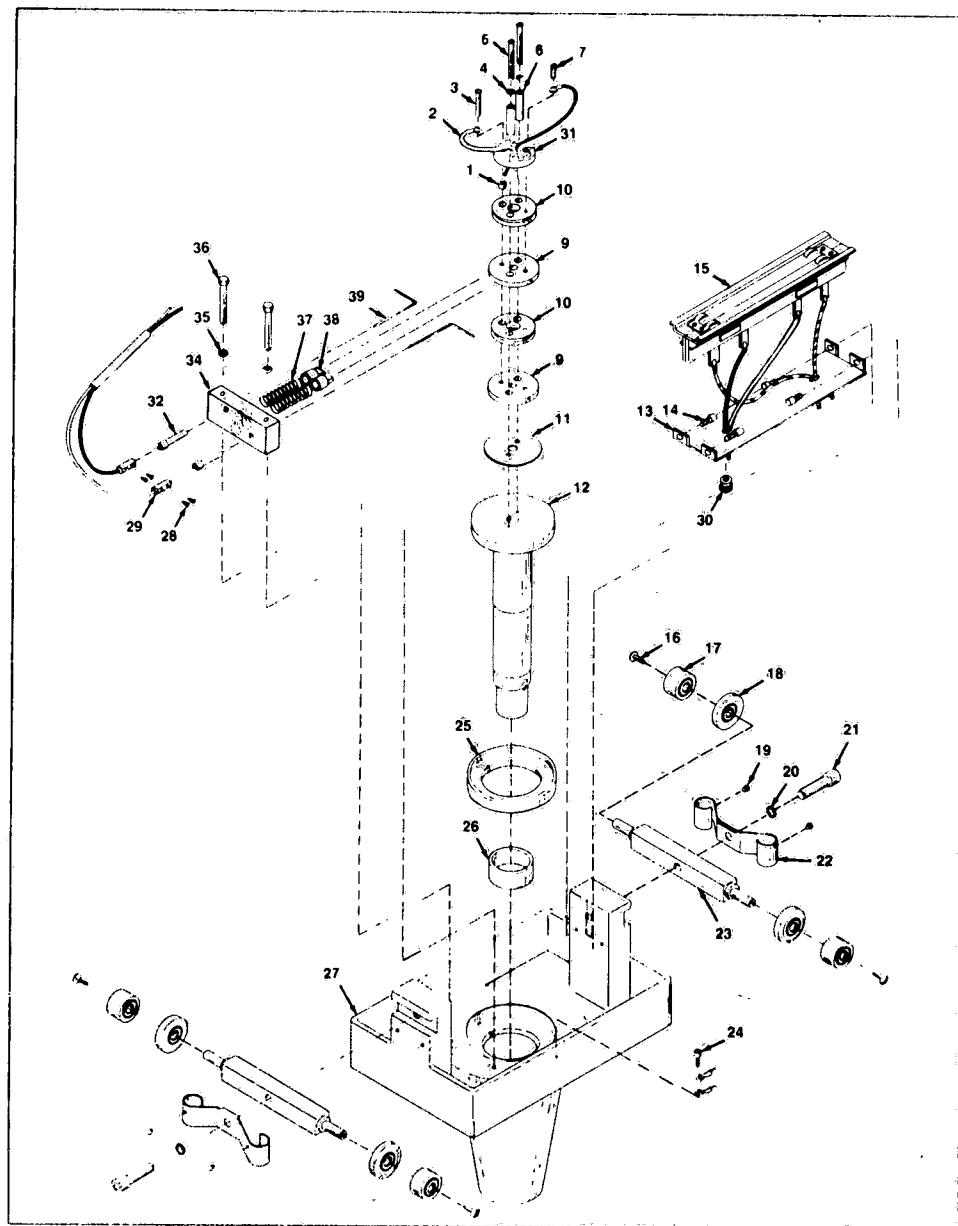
A — Carriage Assembly (For Equipment Shipped After 3/73).
